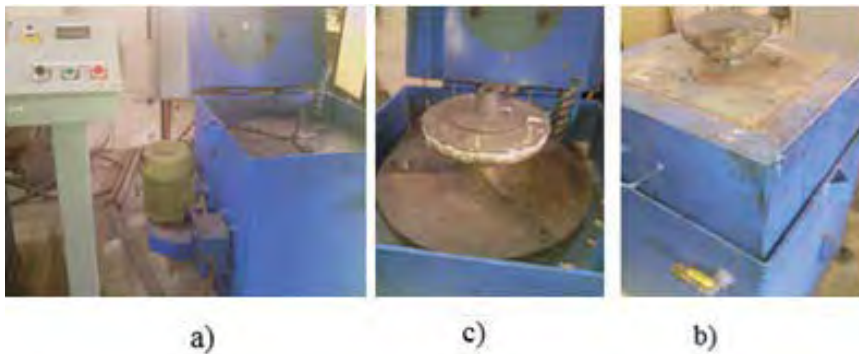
Vertical centrifugal casting machine: a) Unloaded centrifugal machine; b) Centrifugal machine with circular mould and; c) Centrifugal machine ready for pouring
